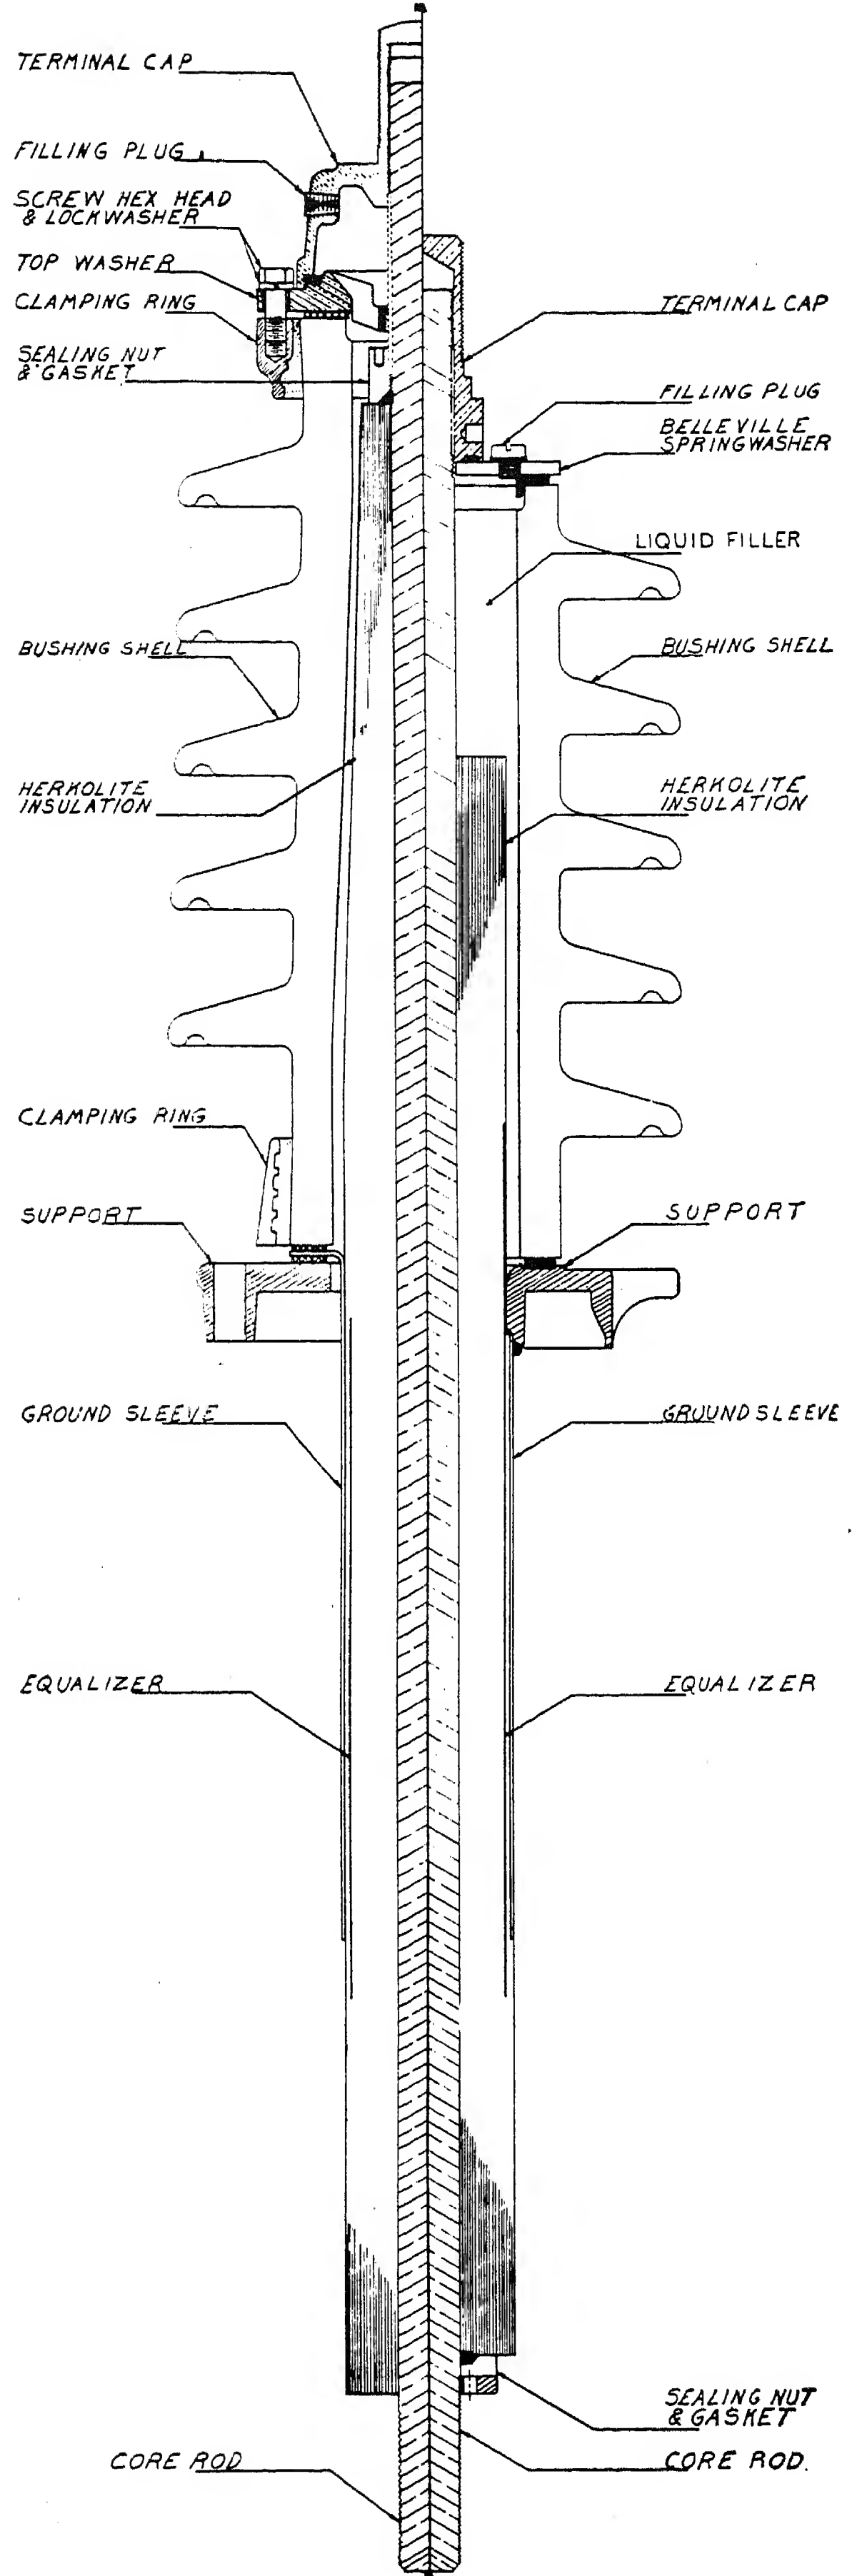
Cross-sectional view showing old and new oil circuit-breaker bushing design
